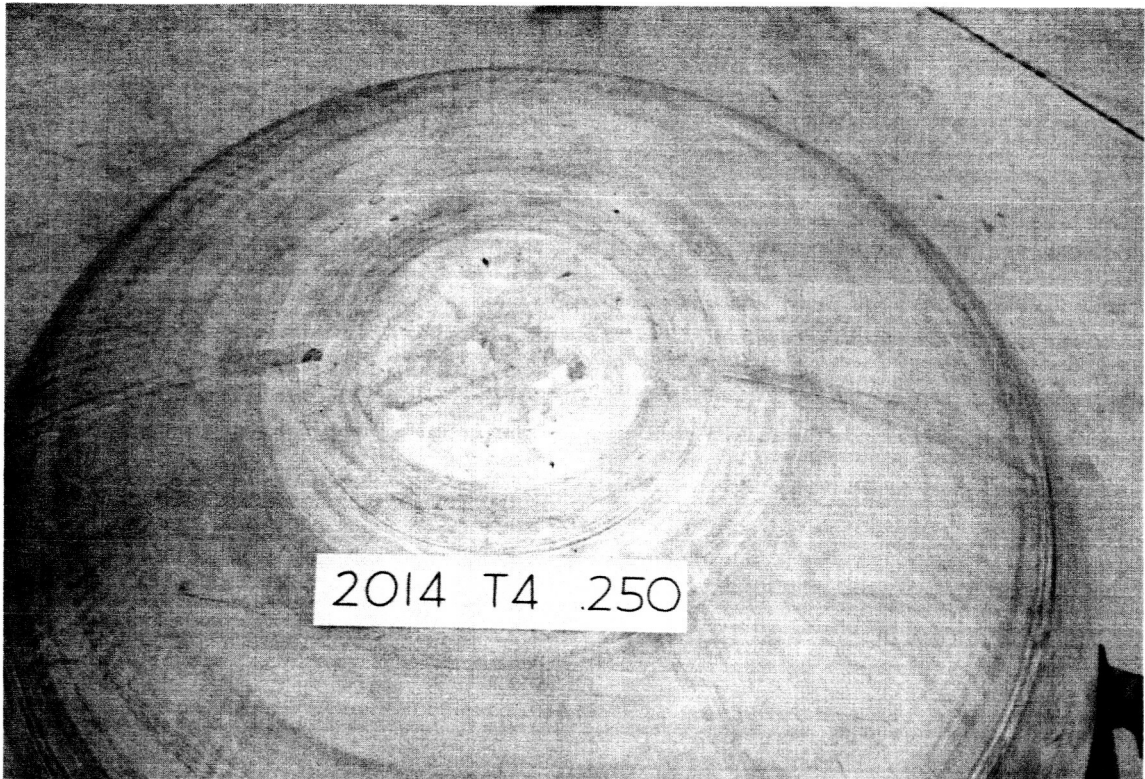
Figure VIII Bulkhead No. 1 - Top View Showing Sound Longitudinal and Circumferential Welds
